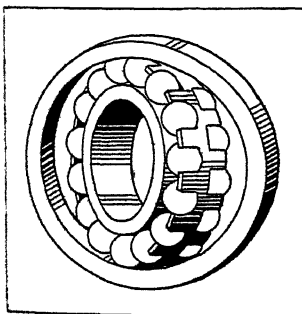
SECTION SHOWING RADIAL BALL BEARING, DEFLECTED POSITION
